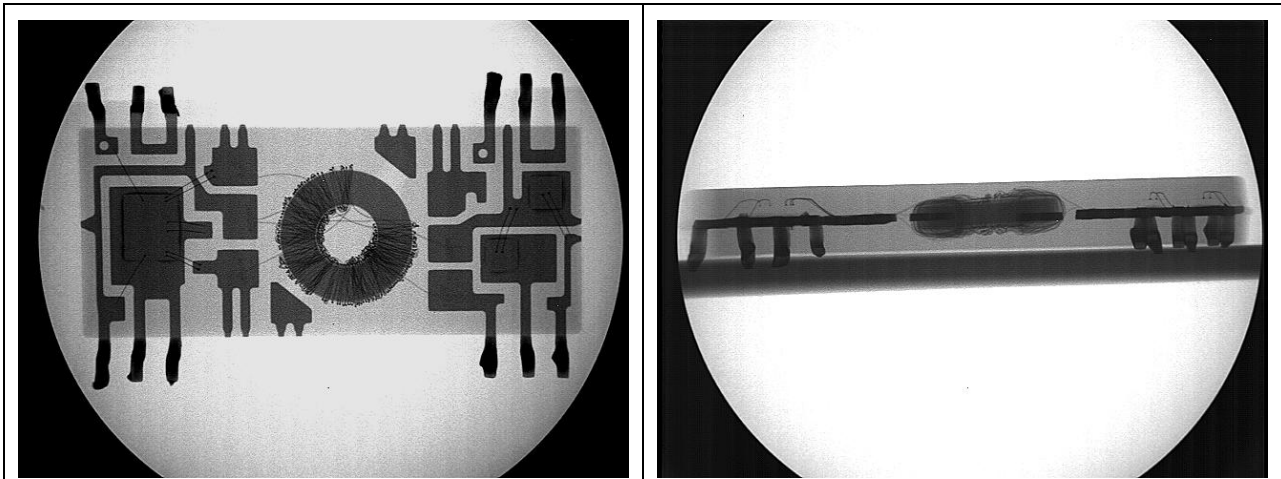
Unit 2. X-ray package top-down and package side views are shown.
